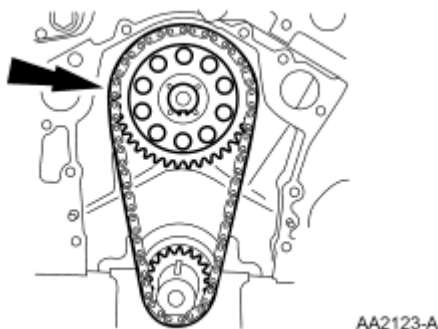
Locating Timing Chain & Camshaft Sprocket
